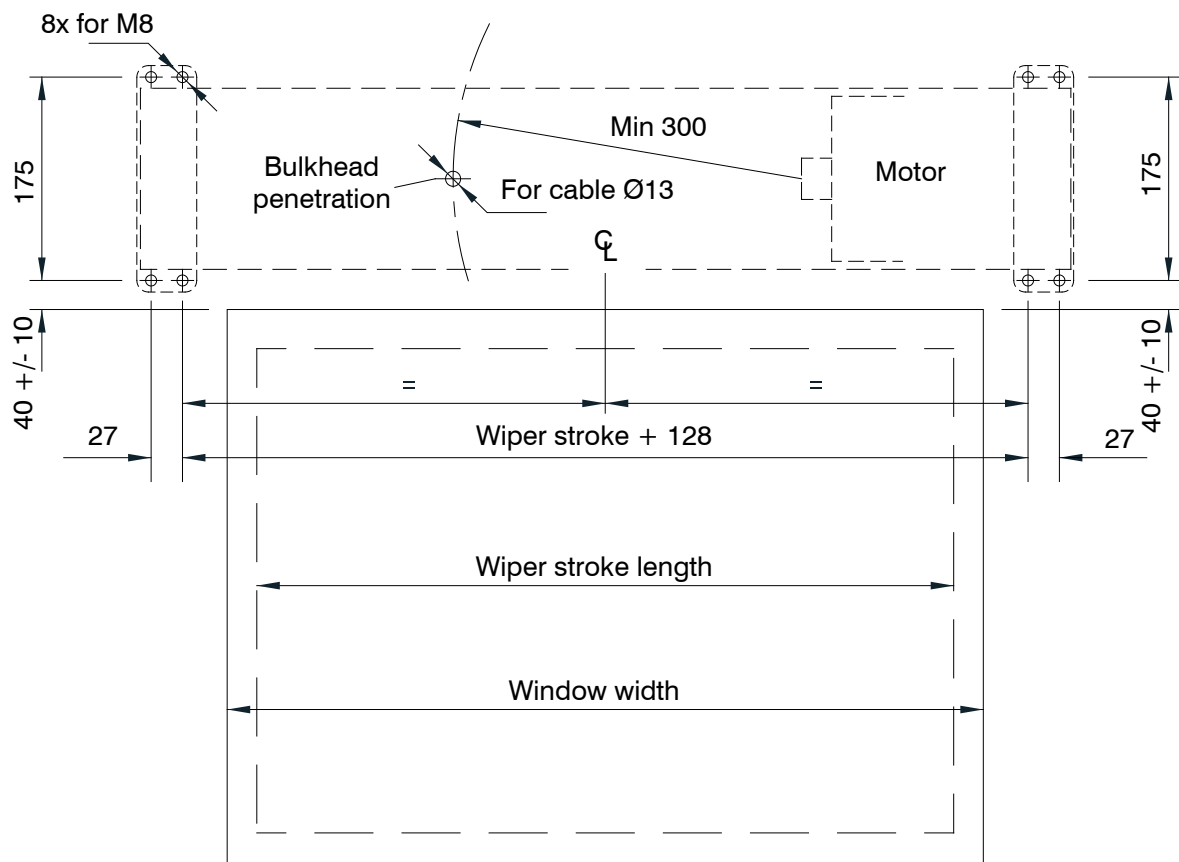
Wiper Unit Footprint (all measurements in mm)
